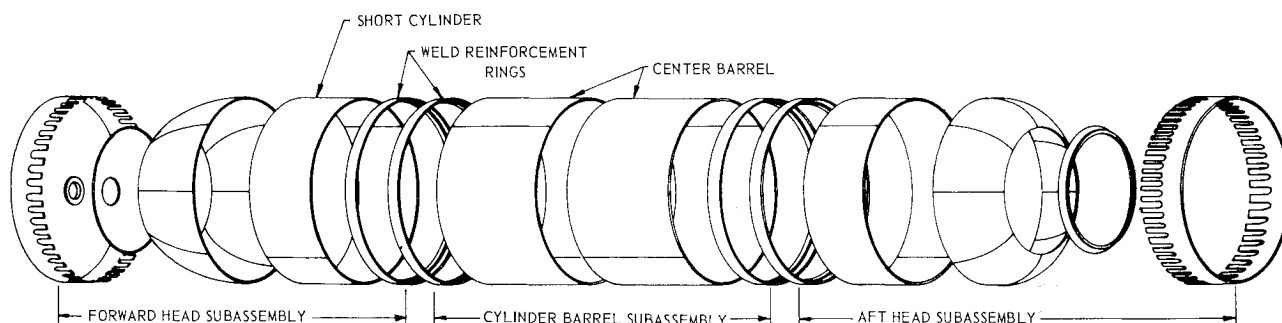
Fabrication approaches. For Approach A, when no heat treatment is required, the weld reinforcement rings are omitted; for Approach B, subassemblies are heat treated as units, and the weld reinforcement rings are used.
